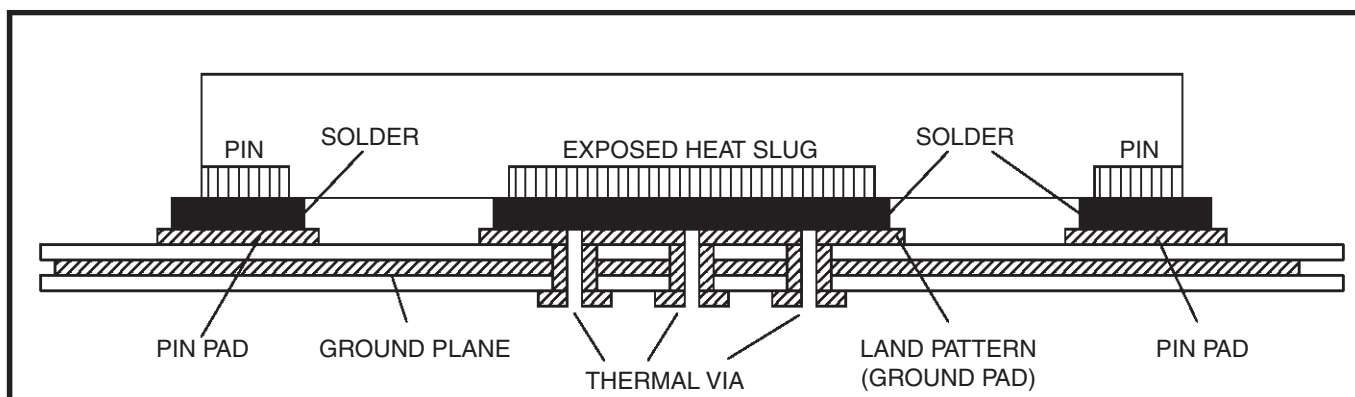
P.C. Assembly for Exposed Pad Thermal Release Path – Side View (drawing not to scale)
